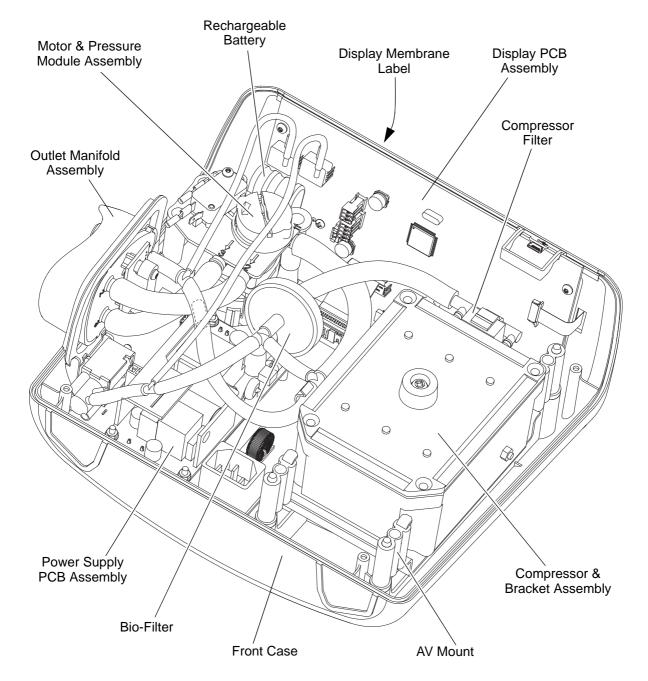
Layout of Sub-Assemblies in the Front Case Assembly
